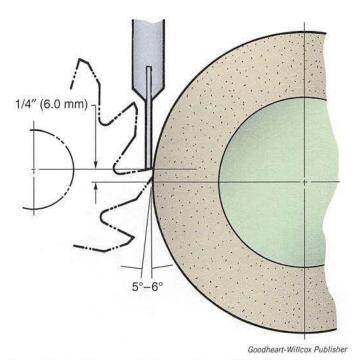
This setup is for grinding a 6" (150 mm) diameter cutter.
